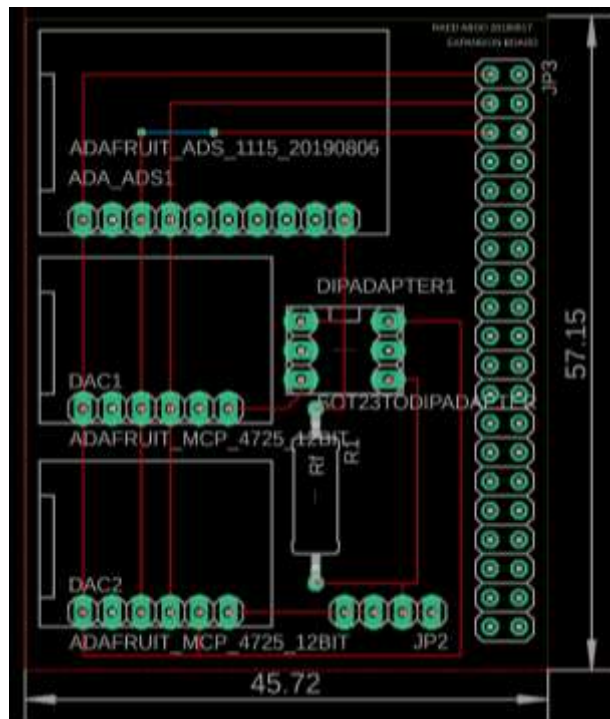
The PCB board layout of the expansion board with the measurements in millimeters.
